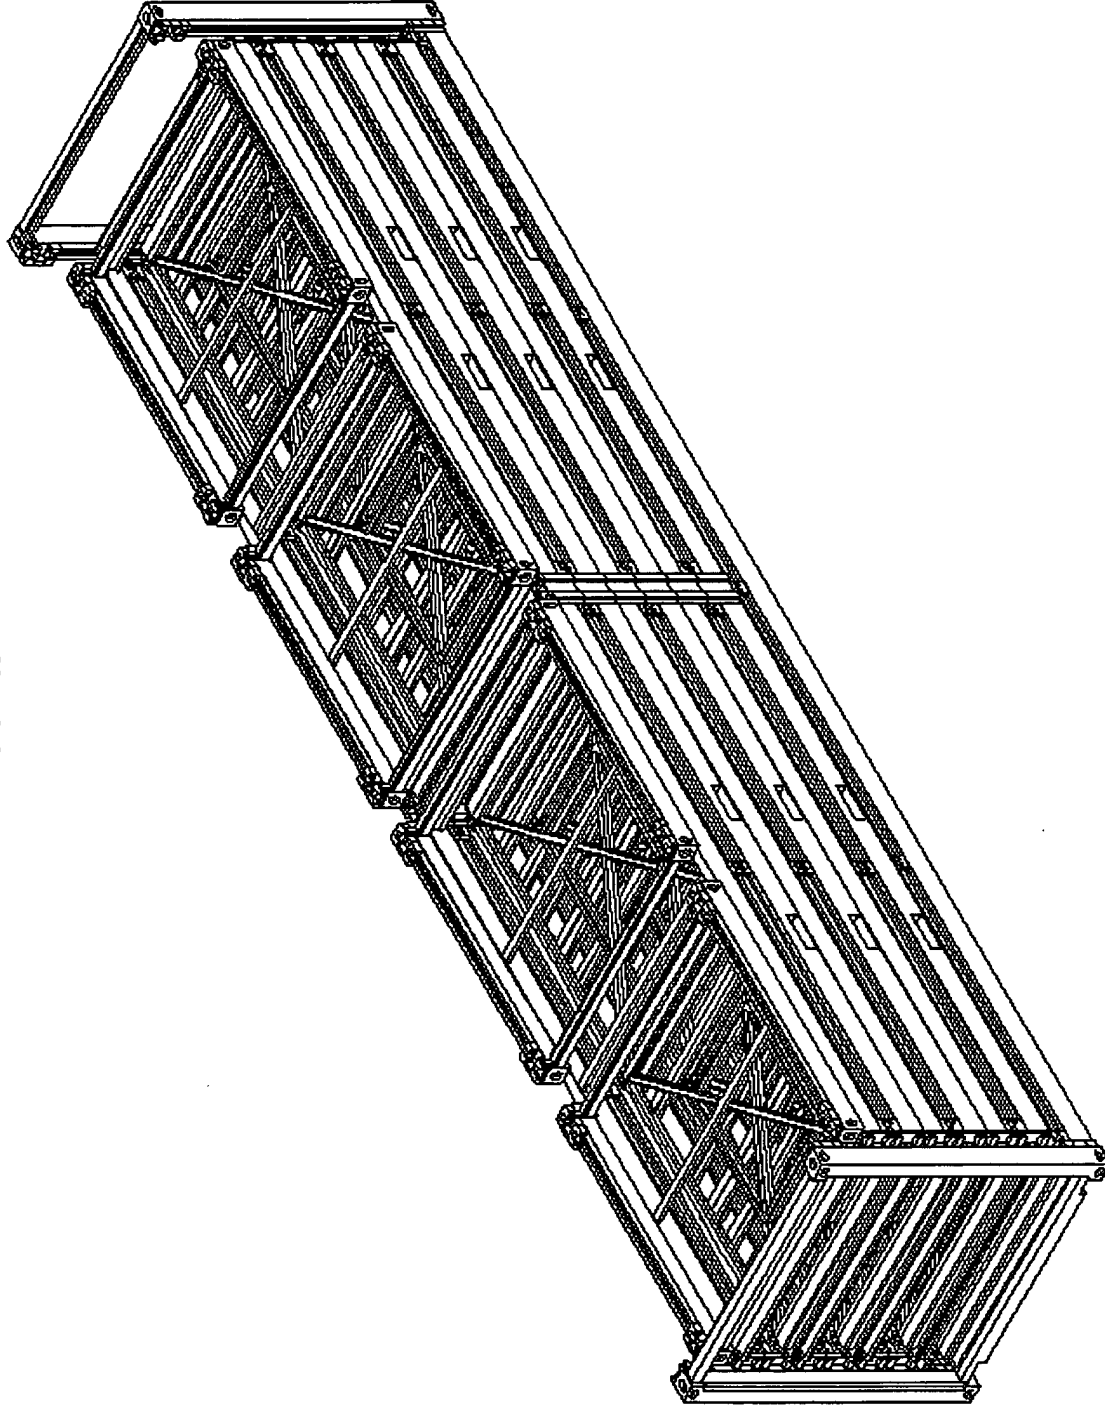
C: Step7 of disassemble and load process: The right frame of the 40 foot shipping collapsible cargo container is assembled.
